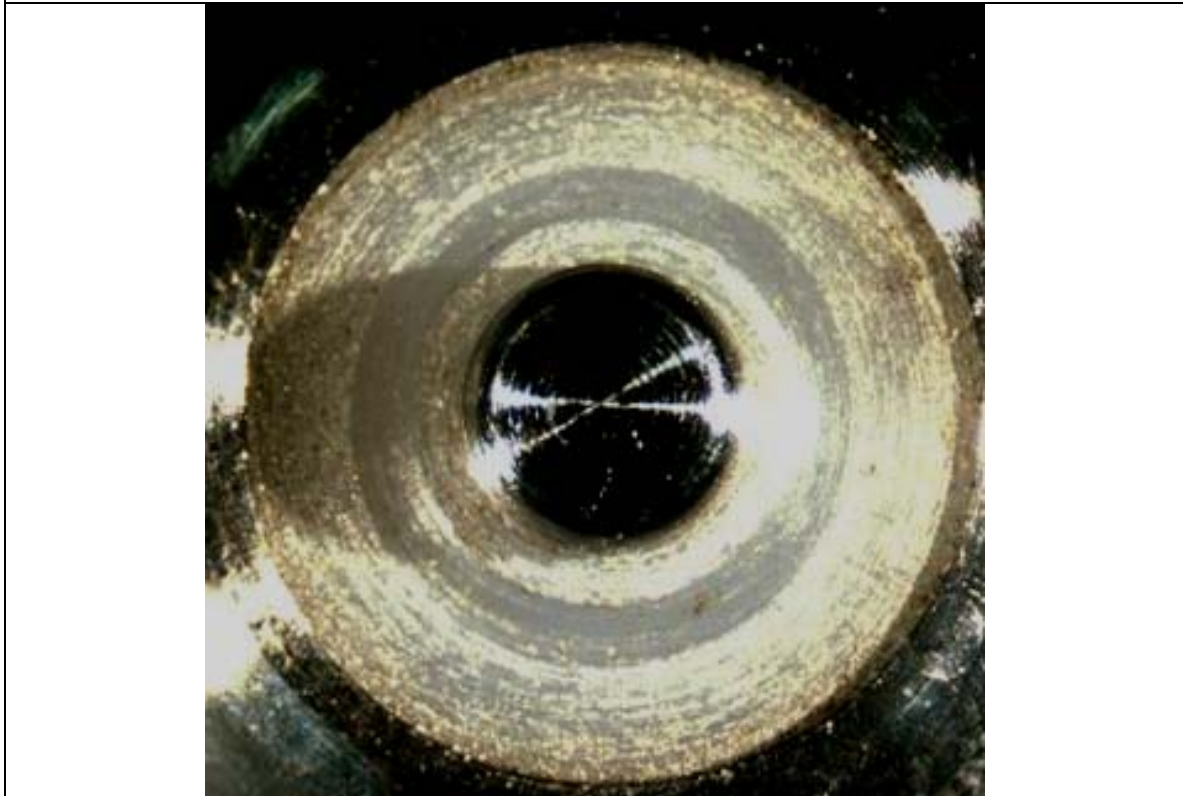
Post-test view of test article TA-2A after disassembly.
